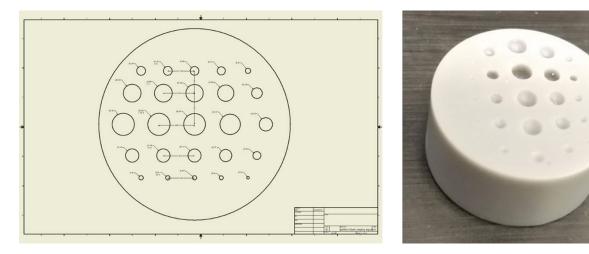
Concave MMS prototype, a) – engineering drawing, b) 3D printed prototype
